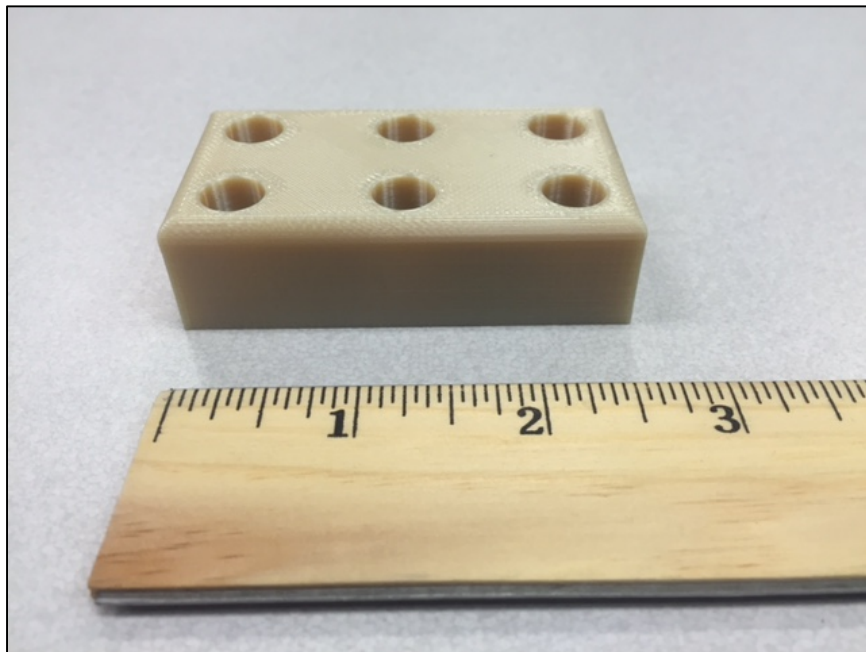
Side View, 3D Printed C-130J Aft Cargo Door Rub Strip
